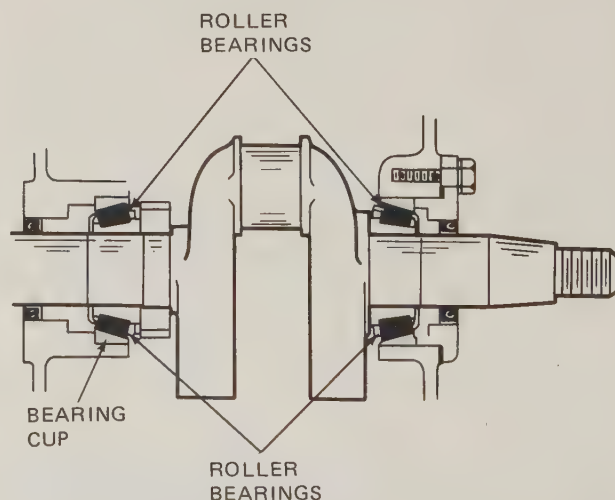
Crankshaft mounted on tapered roller bearings. (Kohler Company)
